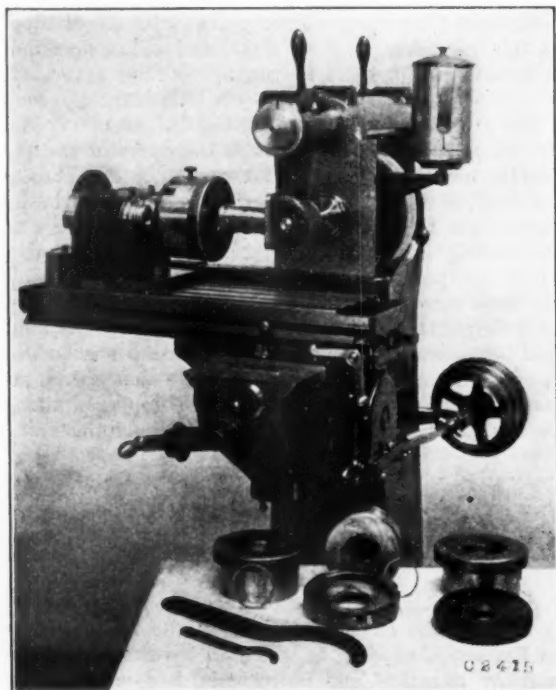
CUTTING 36 INTERNAL GEARS AT A SETTING ON A NO. 0 PLAIN MILLING MACHINE IN 20 SEC. EACH
